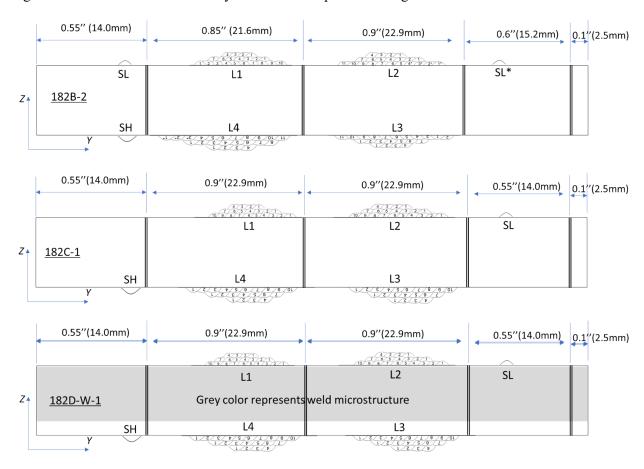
The drawing of the cut and the relative location of each weld pass.
